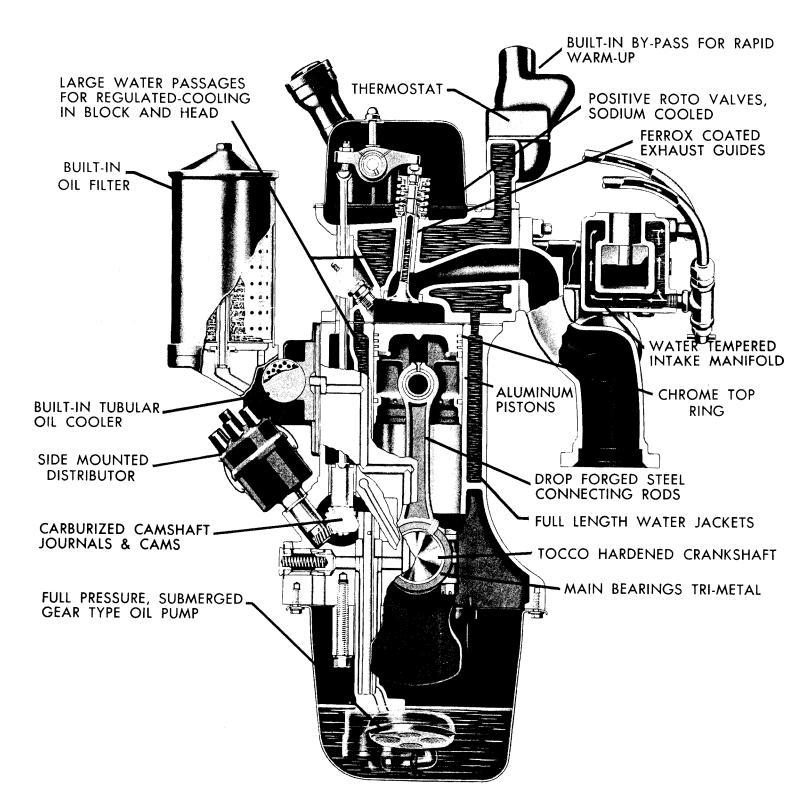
Typical Sectional View of an Overhead Valve Engine (T-6427)
